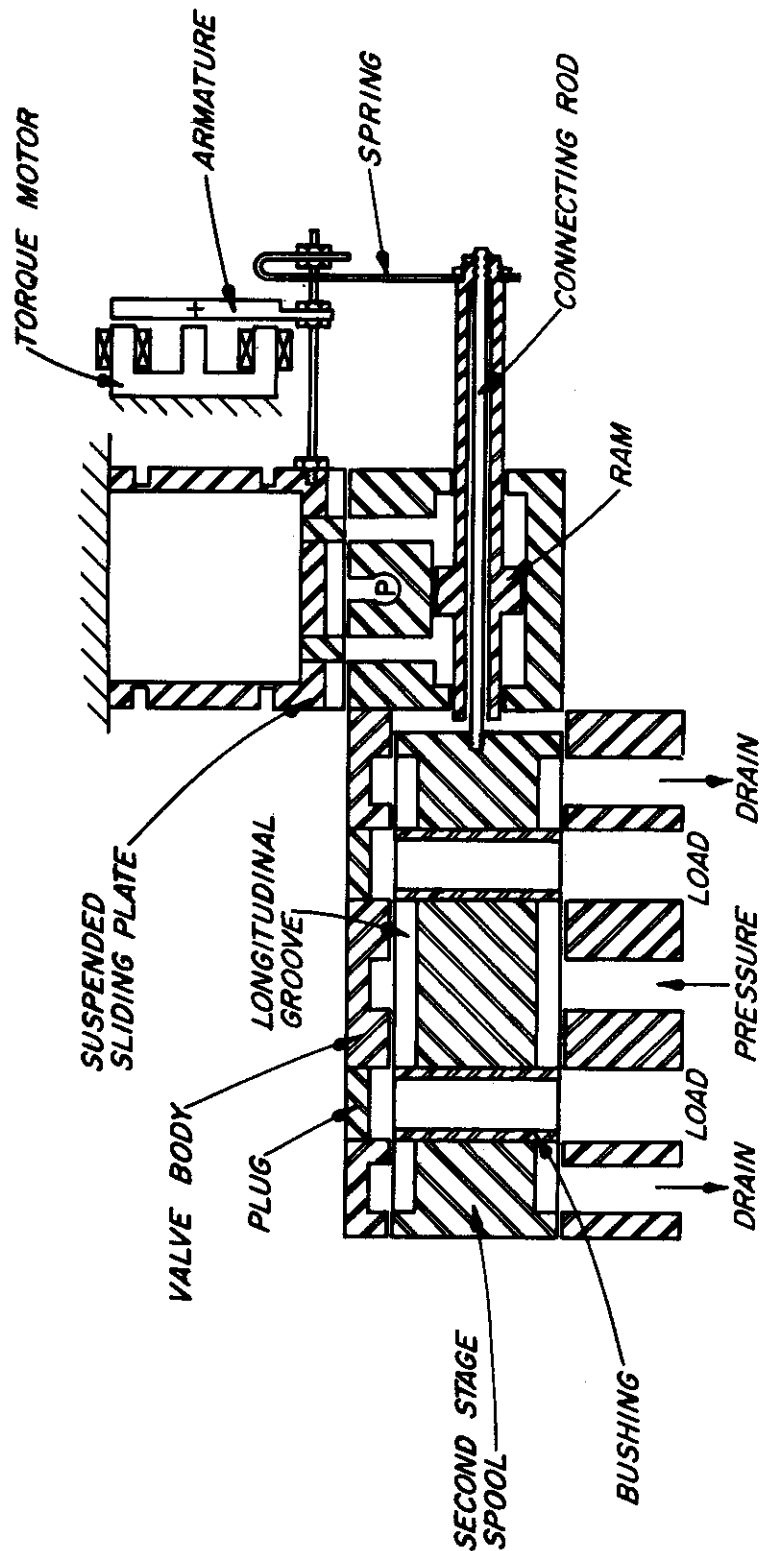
Schematic of MIT 10 HP-A Control Valve
